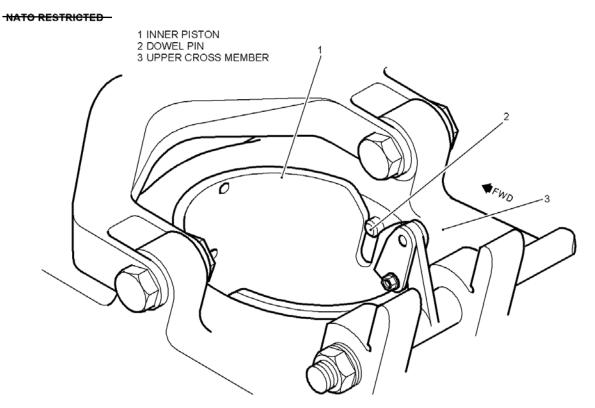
Correct protrusion of inner piston through upper cross members and correct location of dowel pin in V shaped groove (pre Mod.02198 part B)
